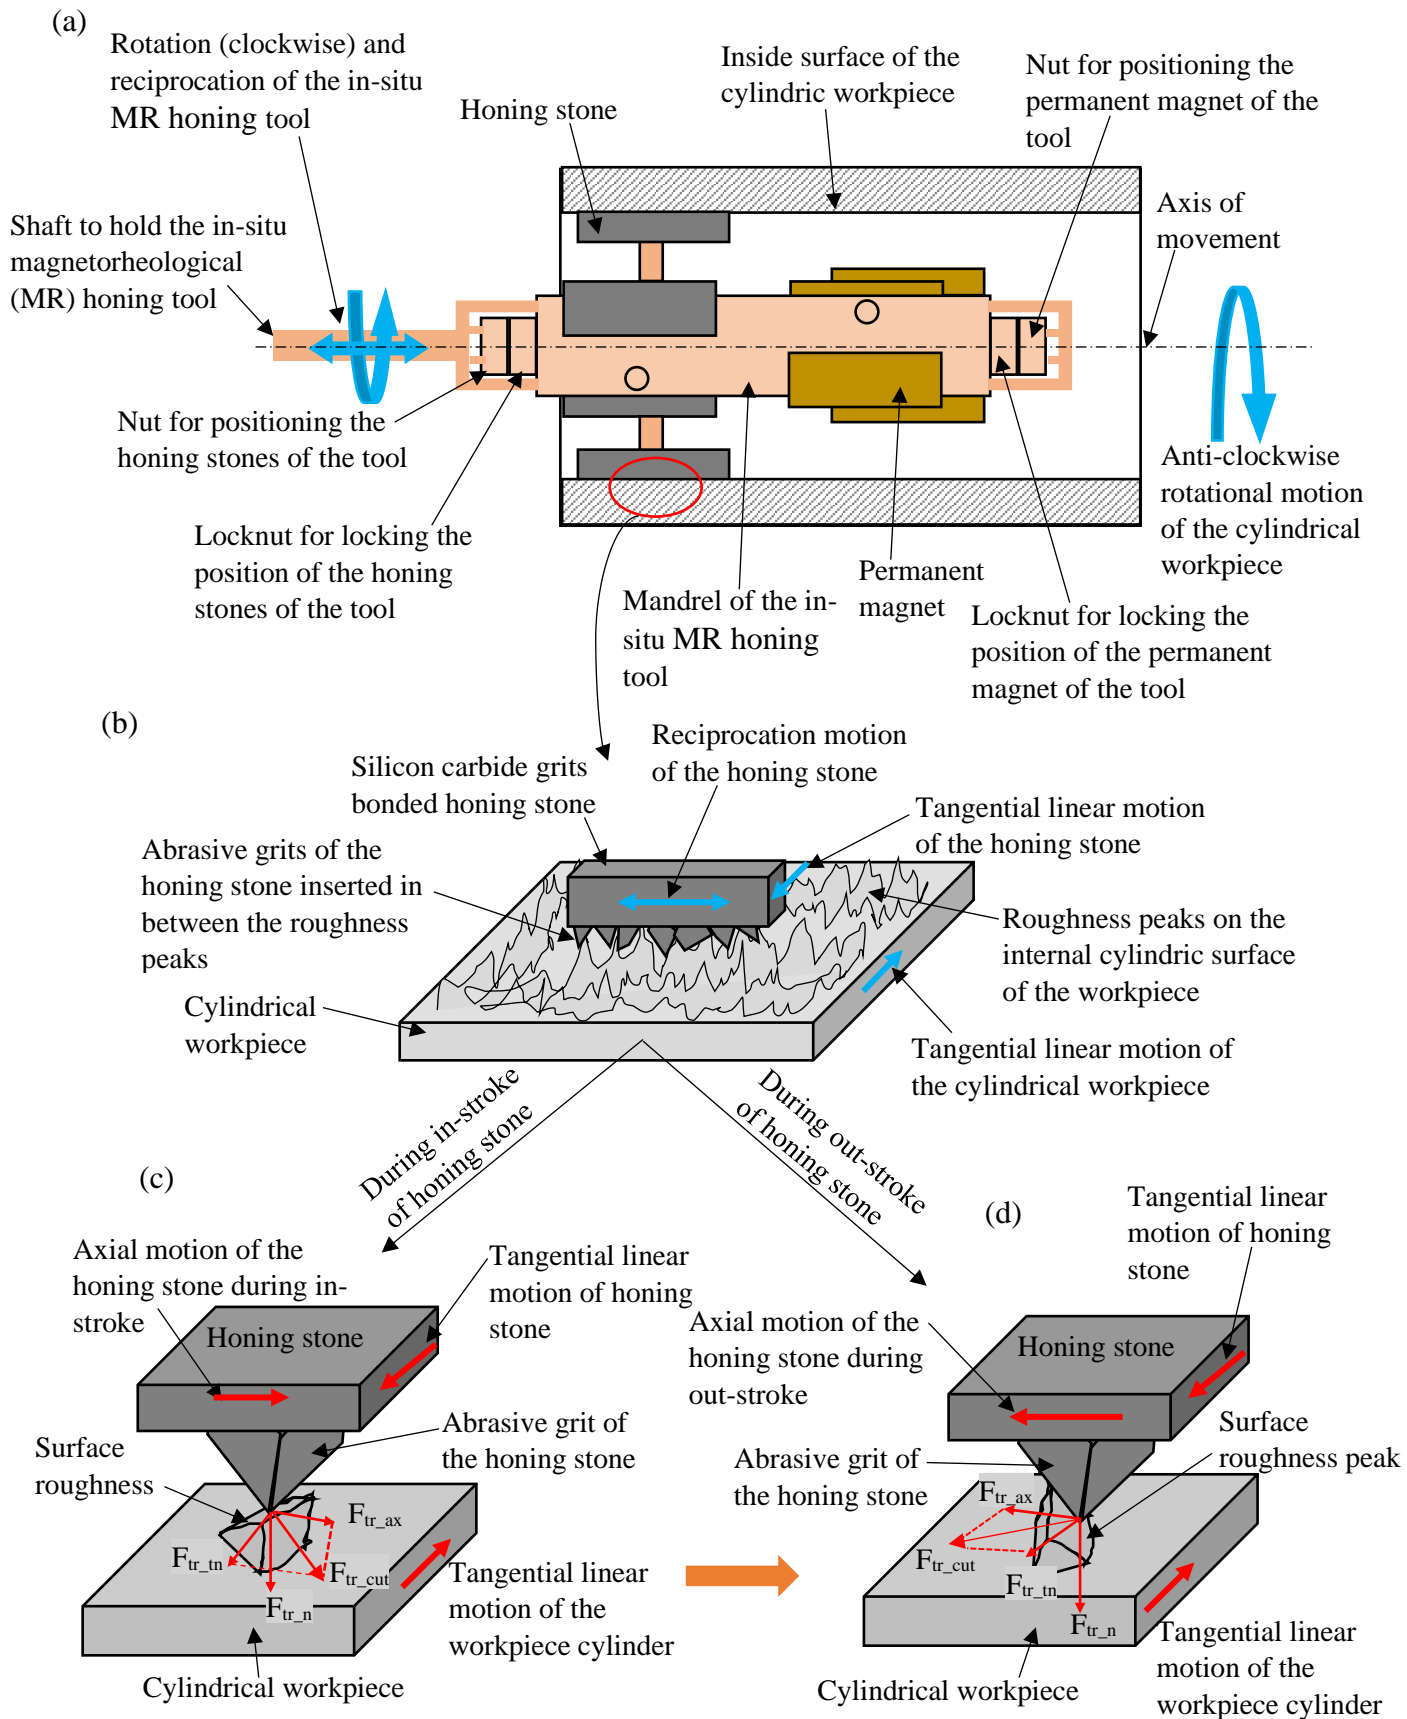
(a) Schematic image of initial surface generation in traditional honing on the inner surface the cylindric workpiece using in-situ honing tool, (b) magnified view of contact between the honing stone and workpiece surface roughness during material abrasion mechanism (c) while in-stroke of the tool, and (d) out-stroke of the tool.
